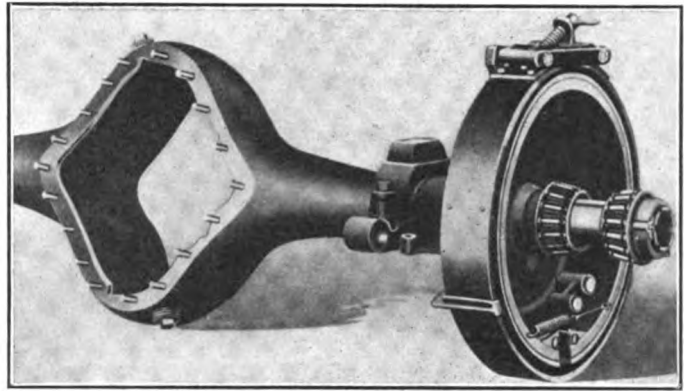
Live rear axle housing presenting Timken roller bearing mounting, brakedrum, and two sets of brakes
